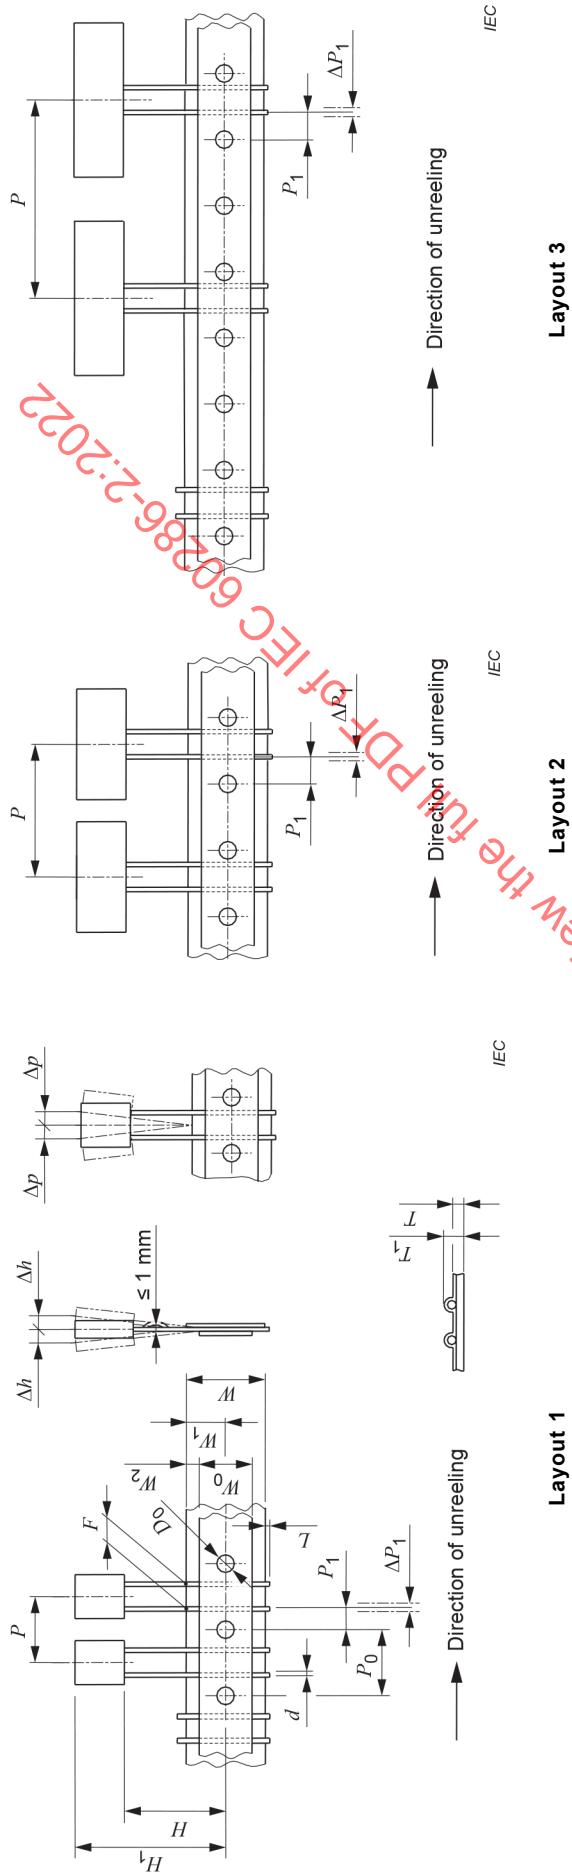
Symbol references for two straight leads, sprocket hole between parts
